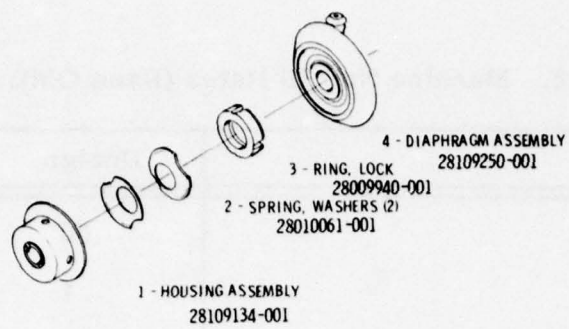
Machine No. 10 - Sensor Release Mechanism Assembly
